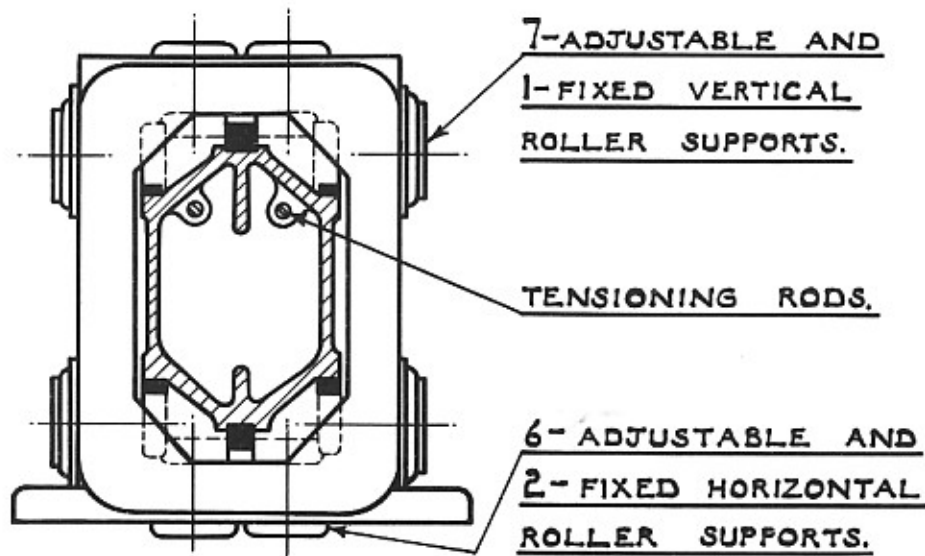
SECTION THROUGH RADIAL ARM AND ROLLER BOX.
